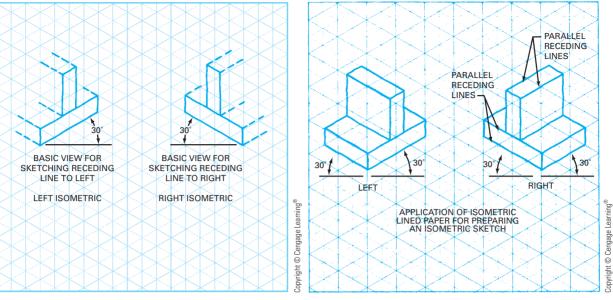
Preliminary view for sketching isometric drawing of a fabricated T-support.
